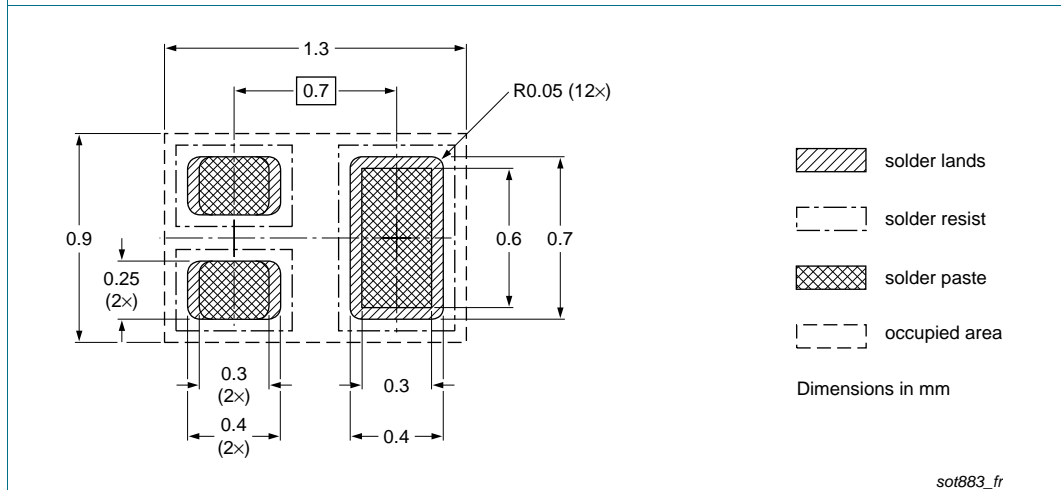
Reflow soldering footprint SOT883 (SC-101)
